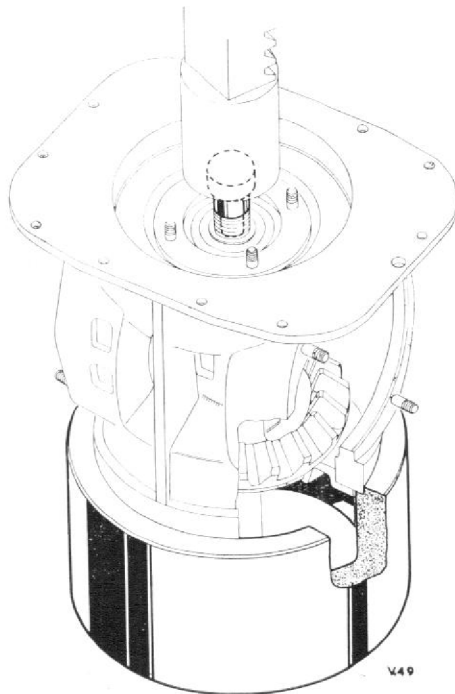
Pot fixture T.74923 and adapter T.73032, used to remove horizontal drive from centre housing.
